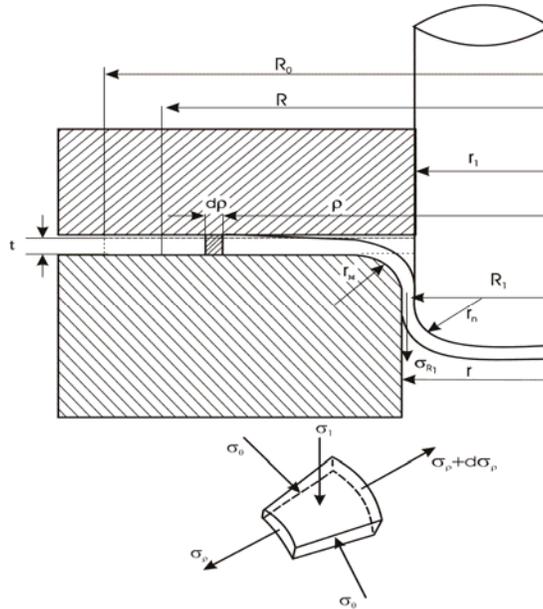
Scheme of the Cylindrical Cup Deep Drawing Process
